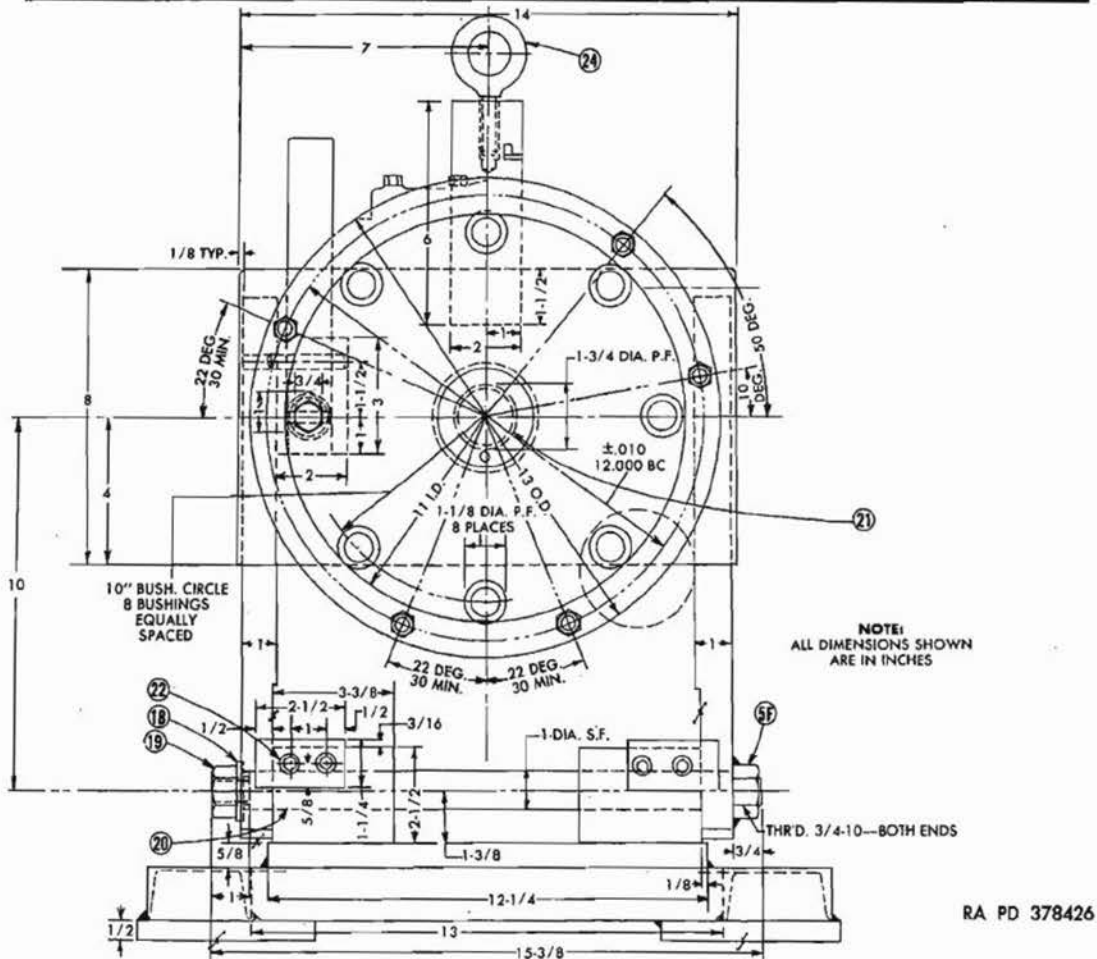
Improved stand for rebuilding engine or transmission and housing fixture - 65909-914241-T17 (sheet 1 of 2).
